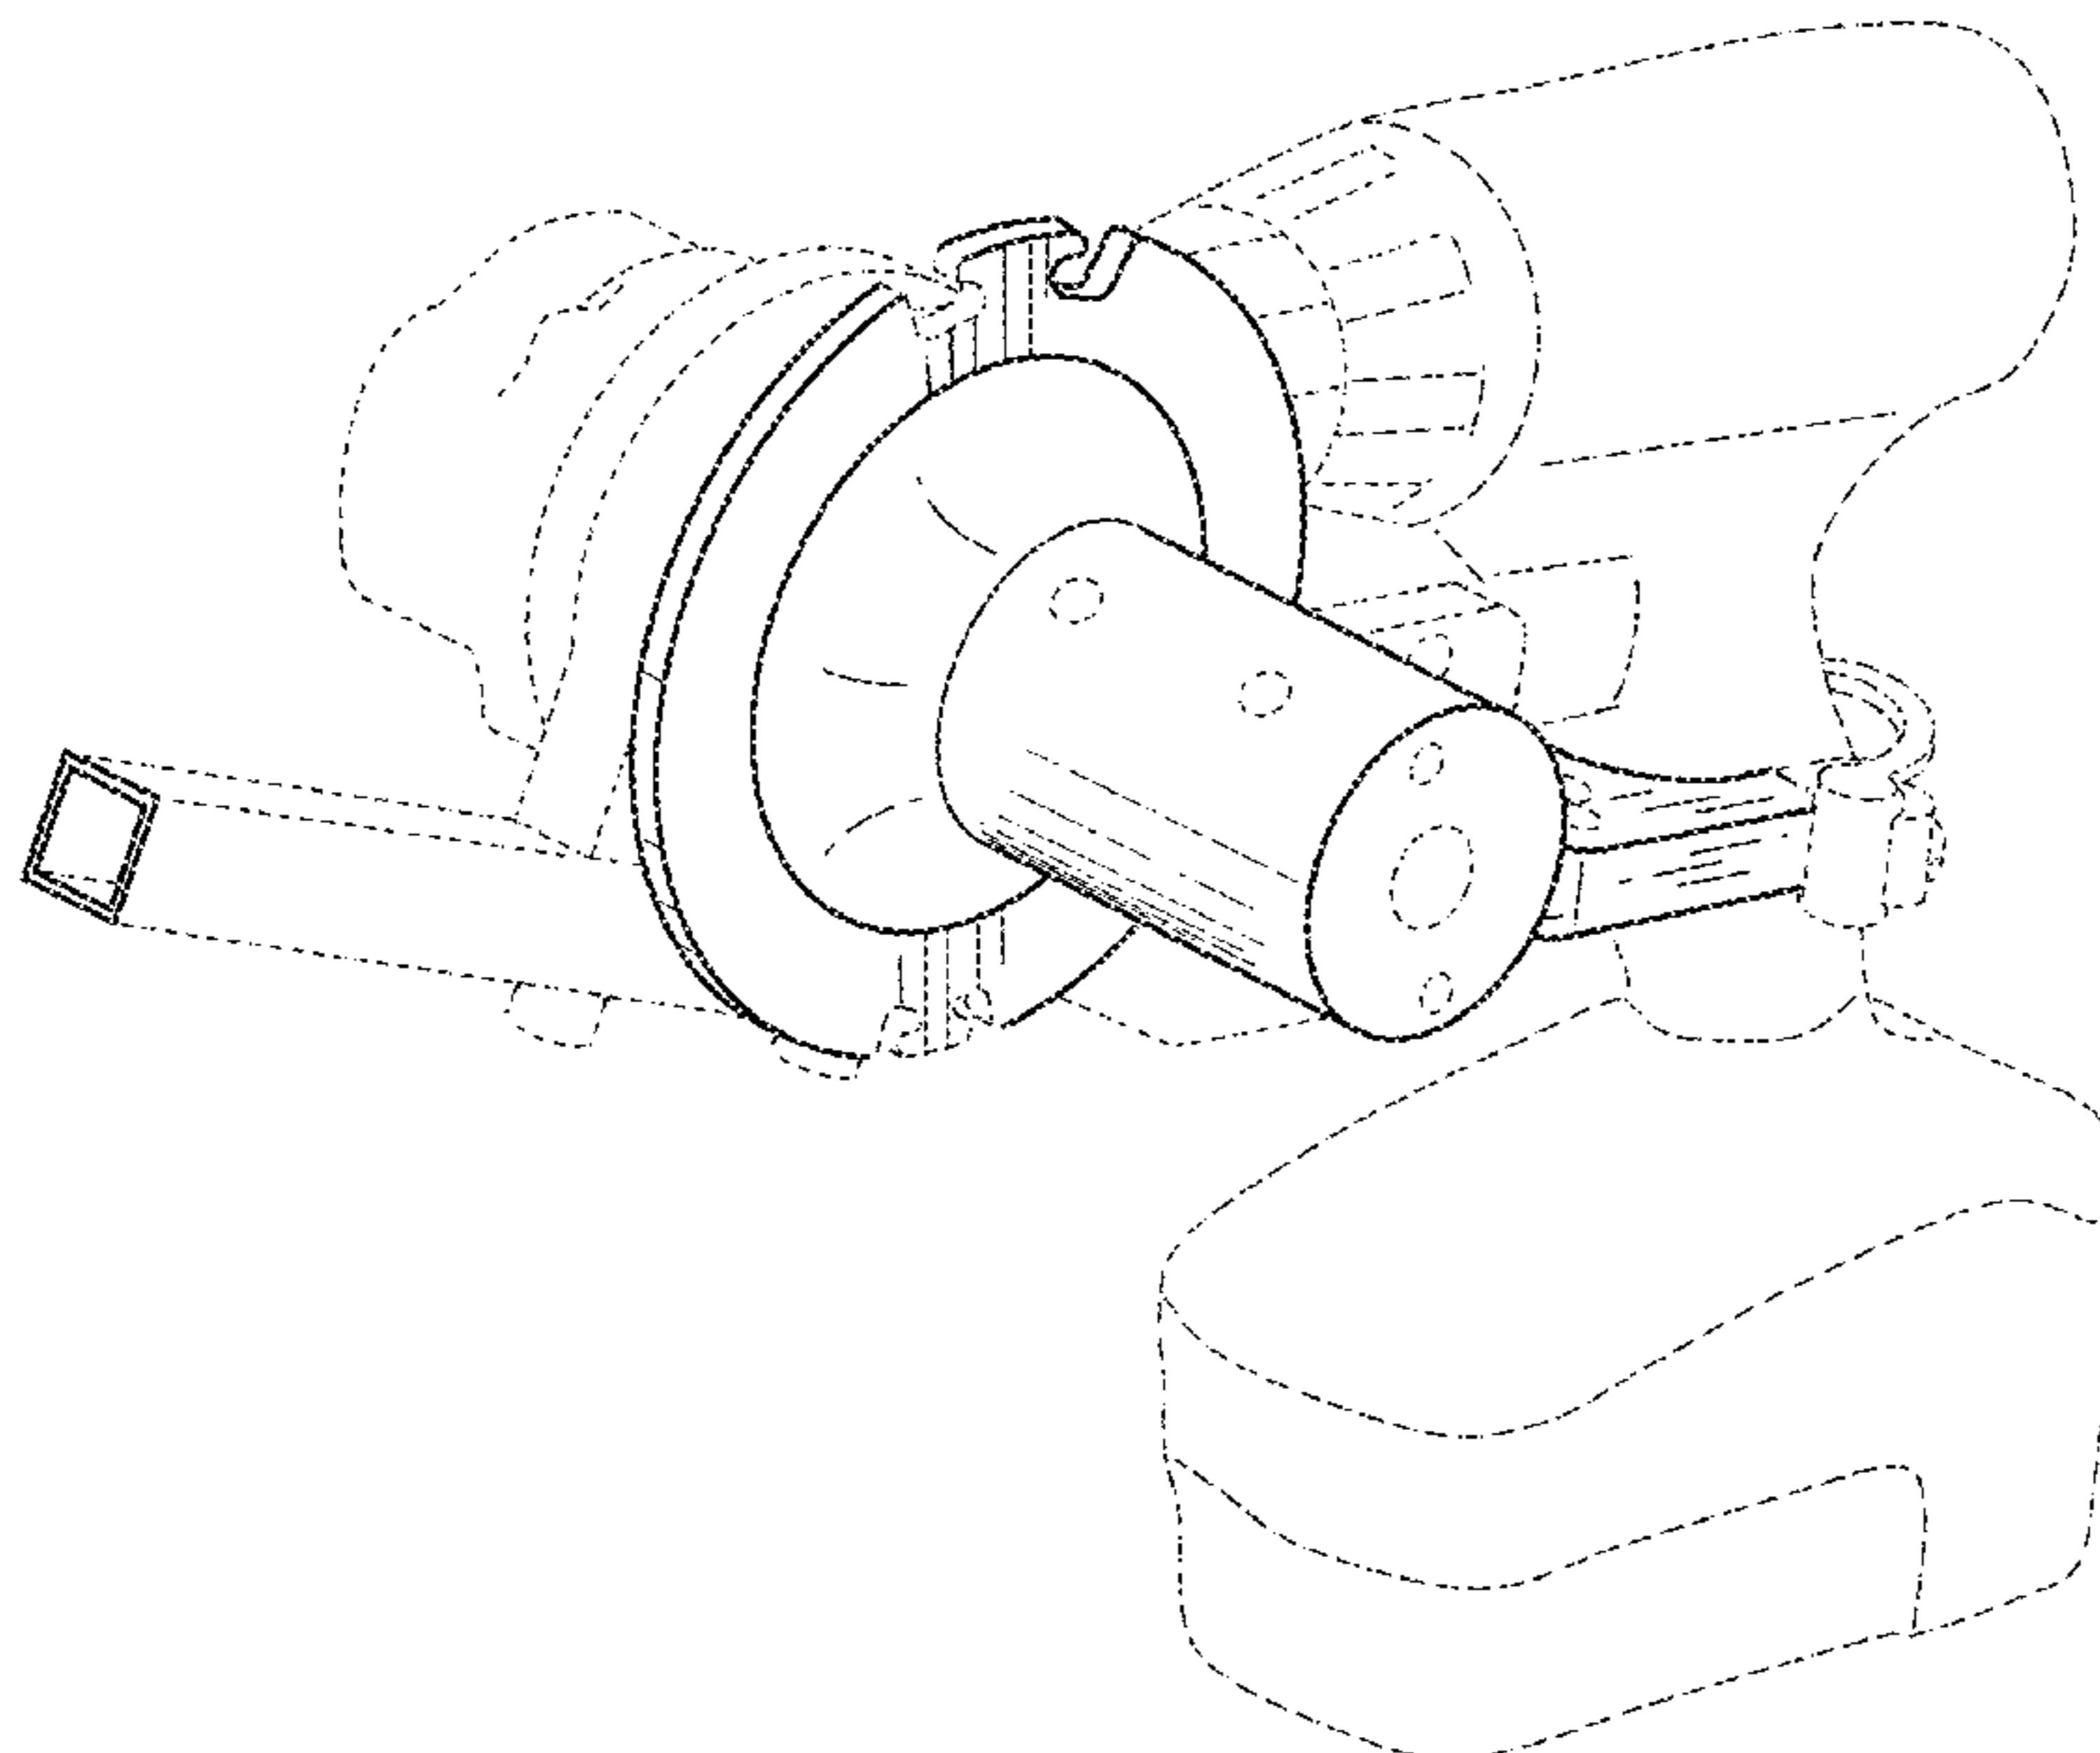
is a top, front, and right side perspective view of a drill powered wire puller embodying my new design, as installed onto an environmental drill;
